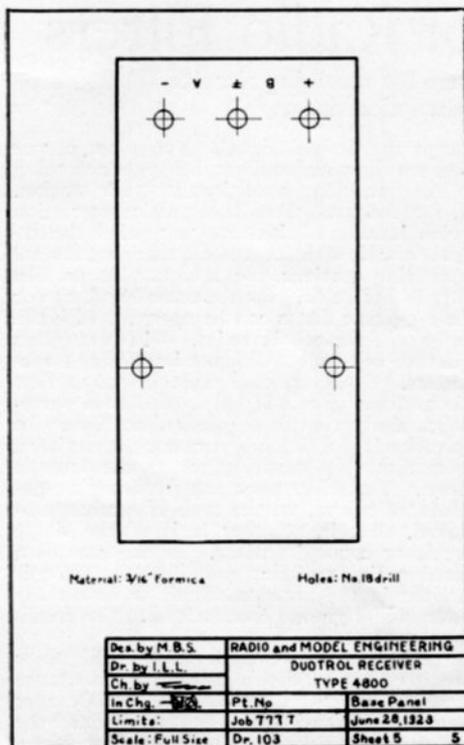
One-half scale drawing of the base panel, showing the location of the holes
